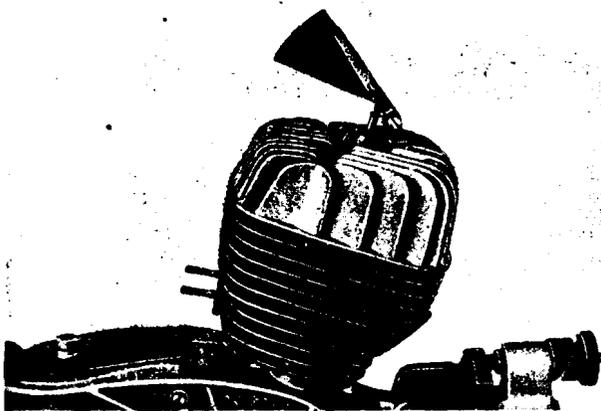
Ignition setting gauge H 8-1408-3 screwed in place
